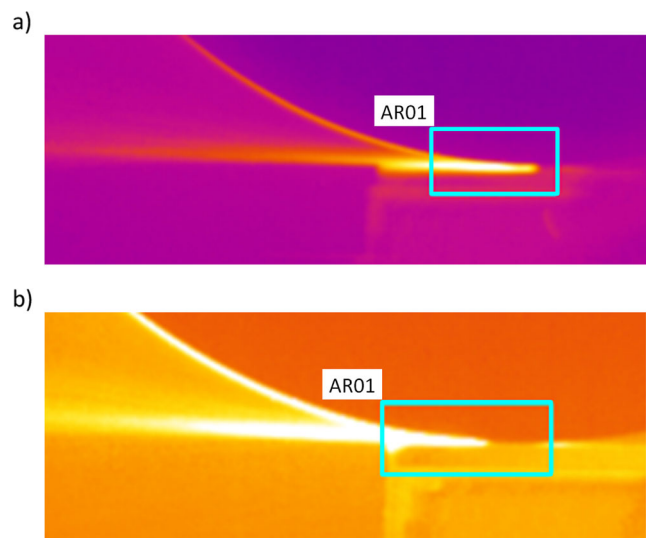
Selected thermographs of the grinding zone, 55N (a) and 56A grinding wheels (b), for the grinding wheel in-feed to the workpiece of $a_d=0.07$ mm
